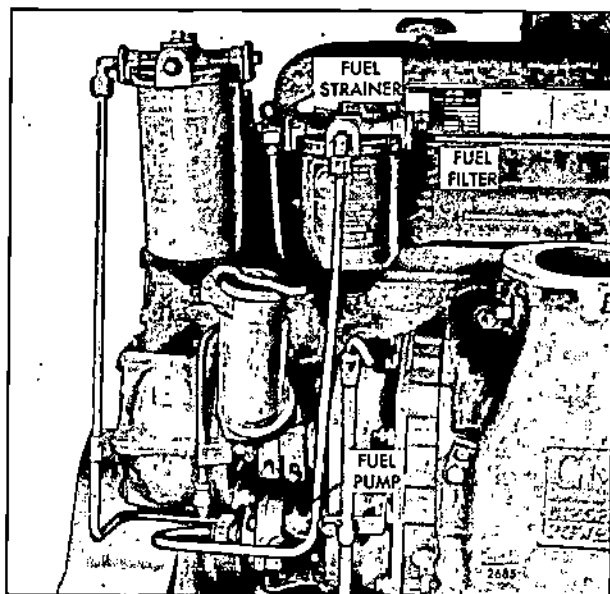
Fuel Pump, Fuel Strainer and Fuel Filter Mounting
